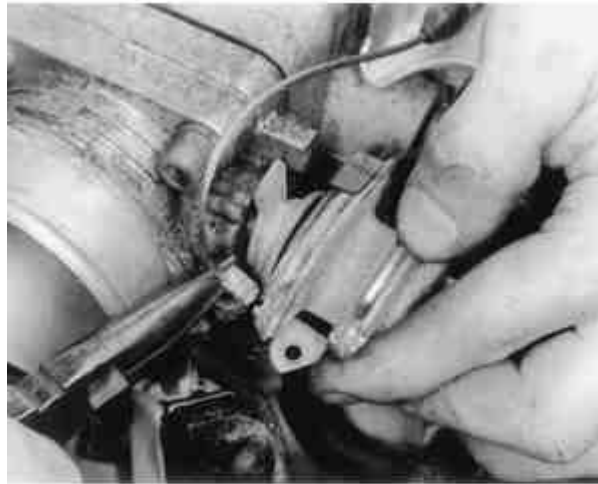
Remove the throttle cable mounting bracket bolts before removing the intake manifold collector
